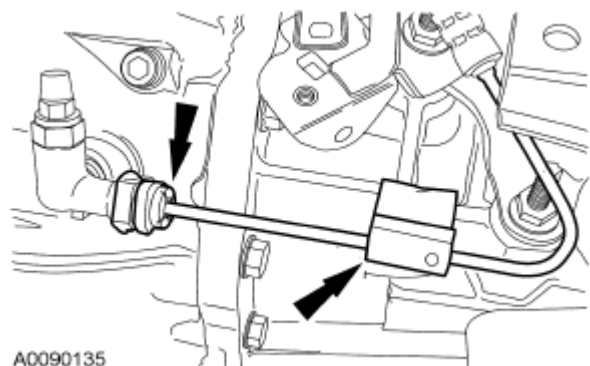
Locating Clutch Hydraulic Tube Fitting
